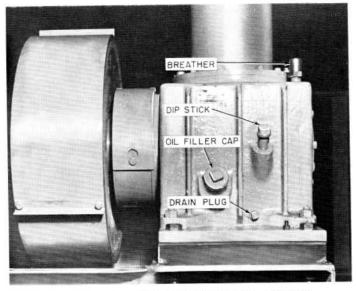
FAN DRIVE GEAR BOX - GDY45
